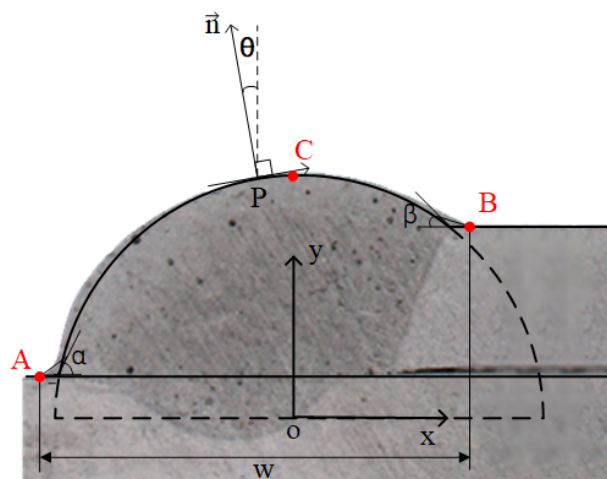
Typical cross-sections of the flatbed lap weld. The new coordinate is established on the weld cross section.
